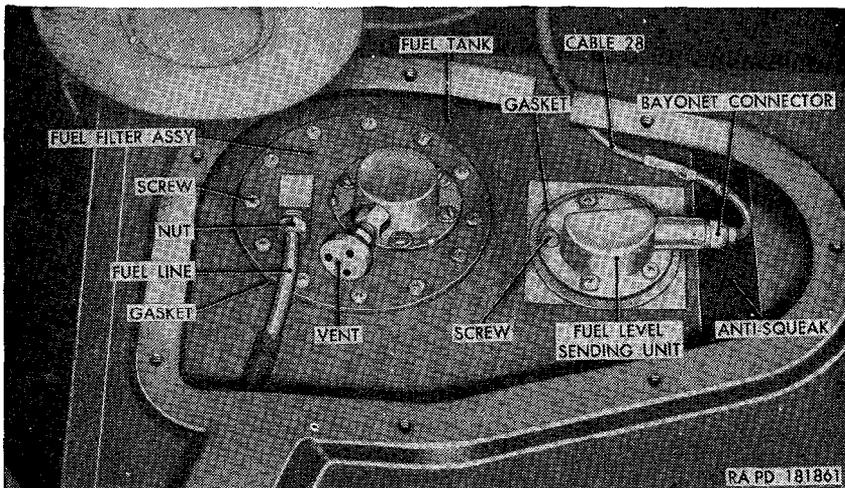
Fuel tank, fuel filter, and fuel level sending unit assemblies (M170)—installed—driver's seat and fuel tank unit access plate removed.
